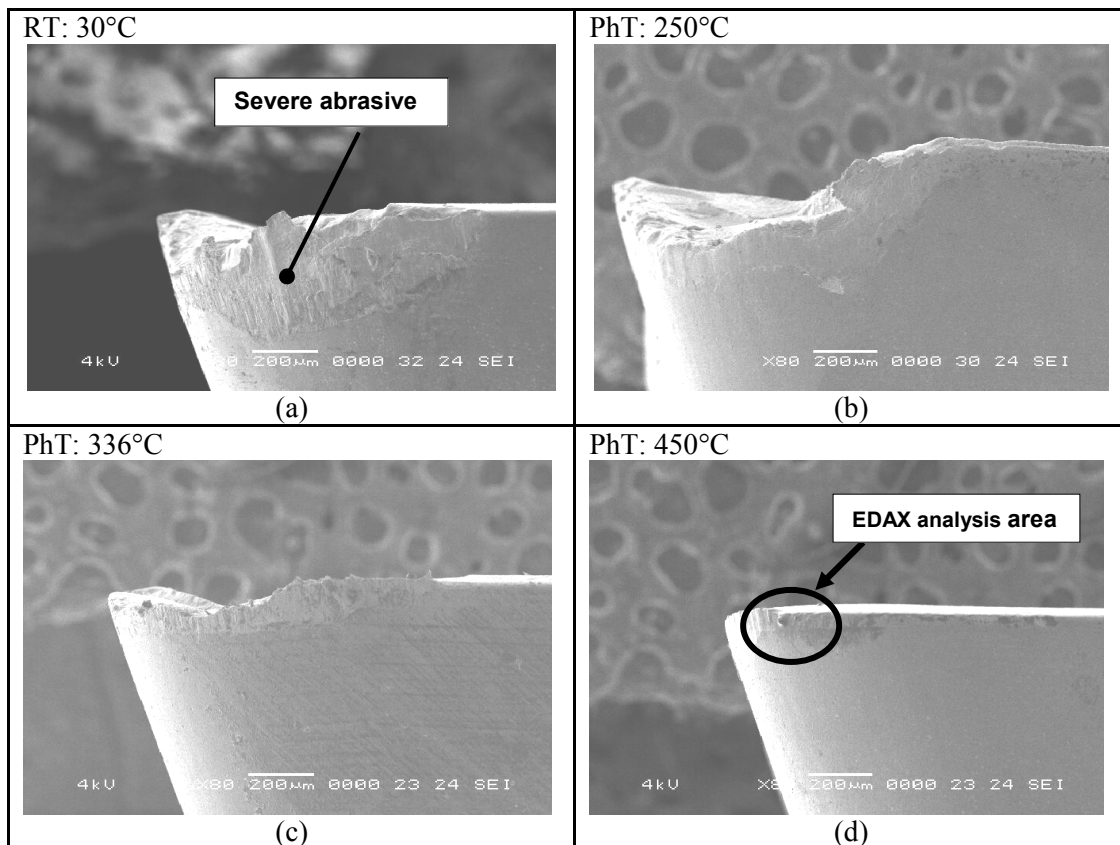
SEM photographs of the worn tools at the end of machining tests: (a) at room-temperature, (b) at 250°C, (c) at 335°C, (d) at 450°C, [$v=56.57$ m/min, $f=0.044$ mm/tooth, $d=1.00$ mm].
